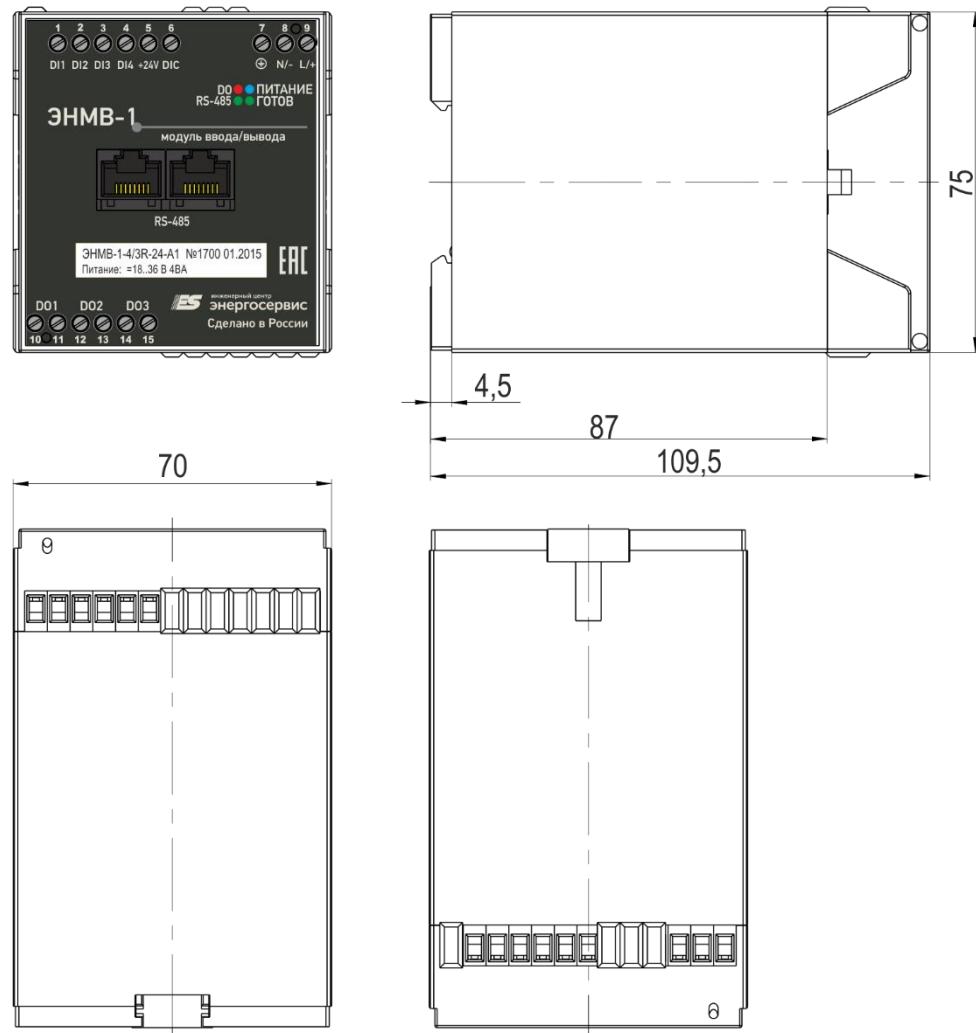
Dimension of ENMV-1-4/3R and ENMV-1-0/3R (in mm)
